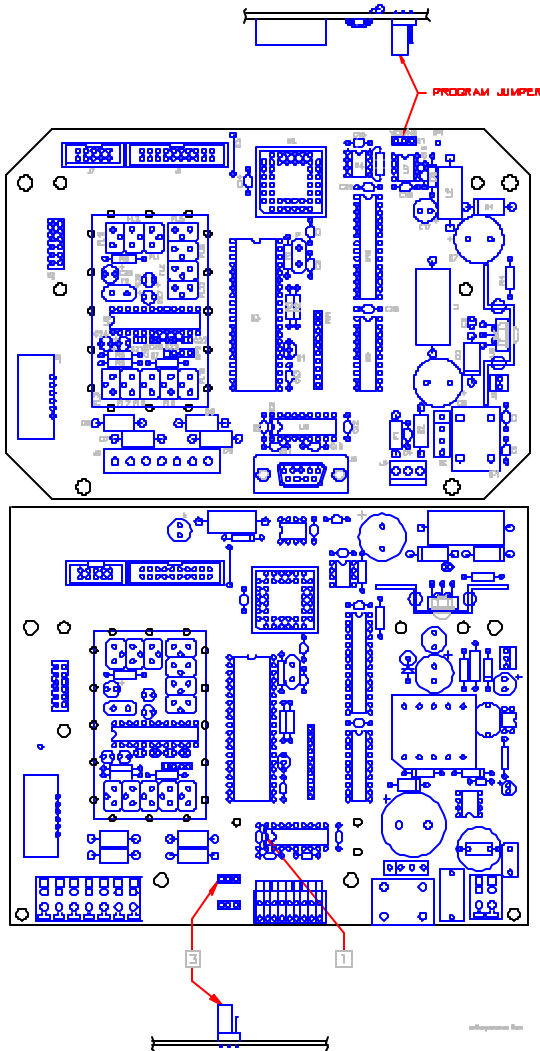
Program Jumper (External and Internal Power Supply Boards)
